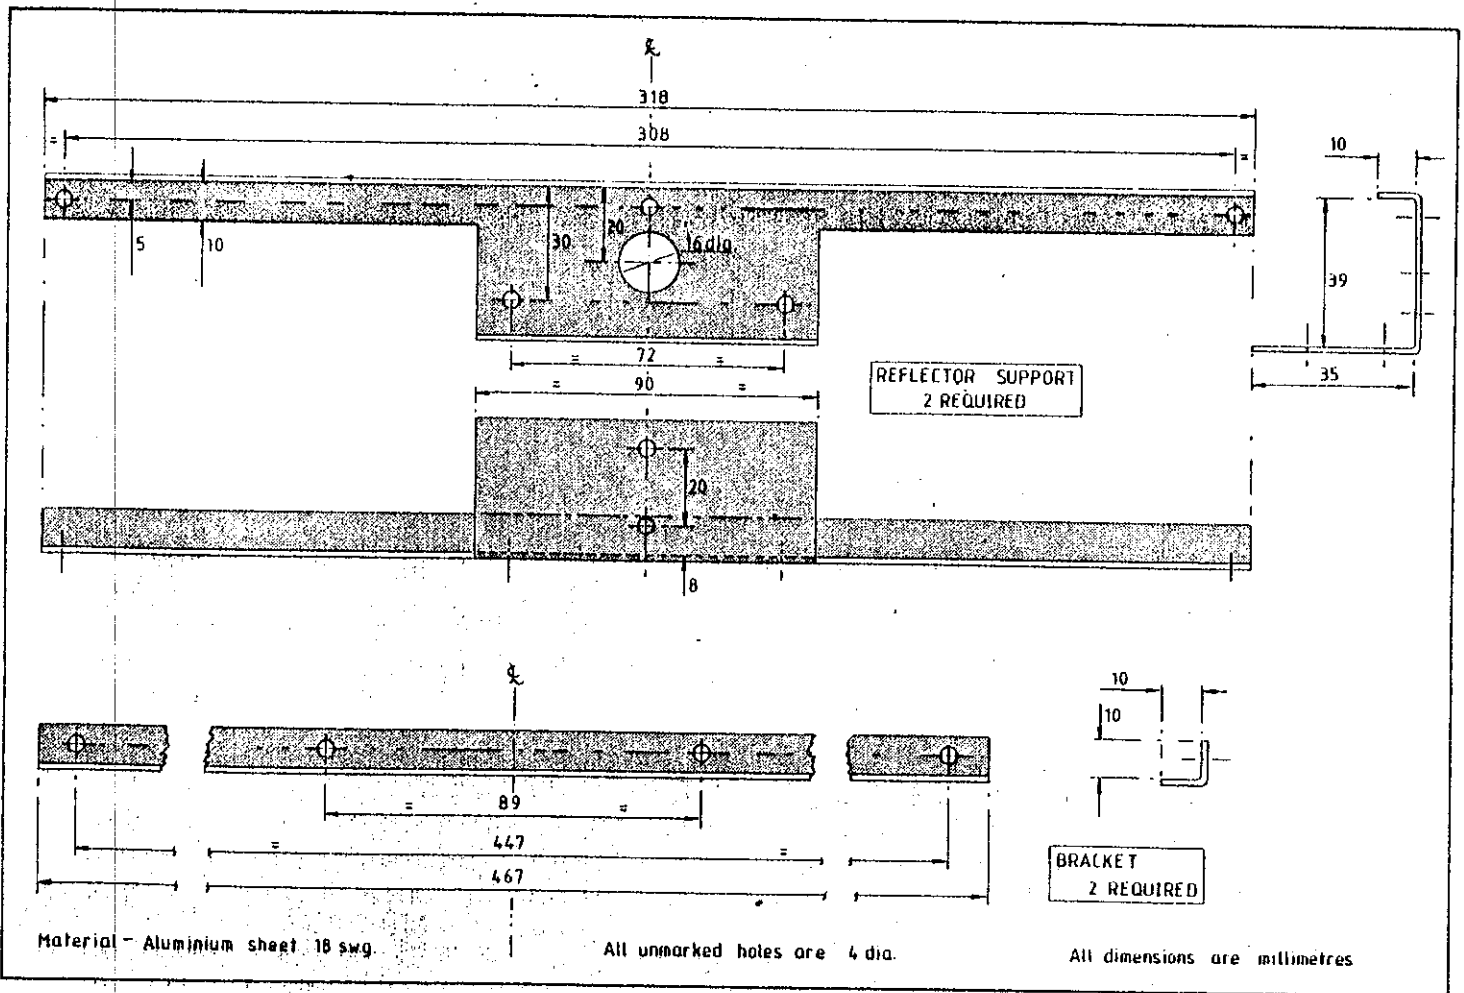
Reflector support is fabricated from 18 s.w.g. aluminium sheet; two of each part are needed. Assemble as shown in Fig. 3. The parts are fixed through the reflector mesh with twelve 10mm M3 screws and stiff-nuts, backed with 16mm diameter washers cut from waste aluminium.
